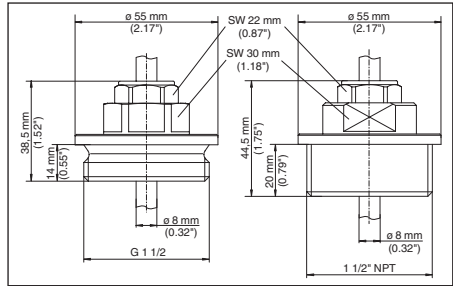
Screw connection for suspension cable G1 1/2 (DIN 3852-A), 1 1/2 NPT (ASME B1.20.1)
